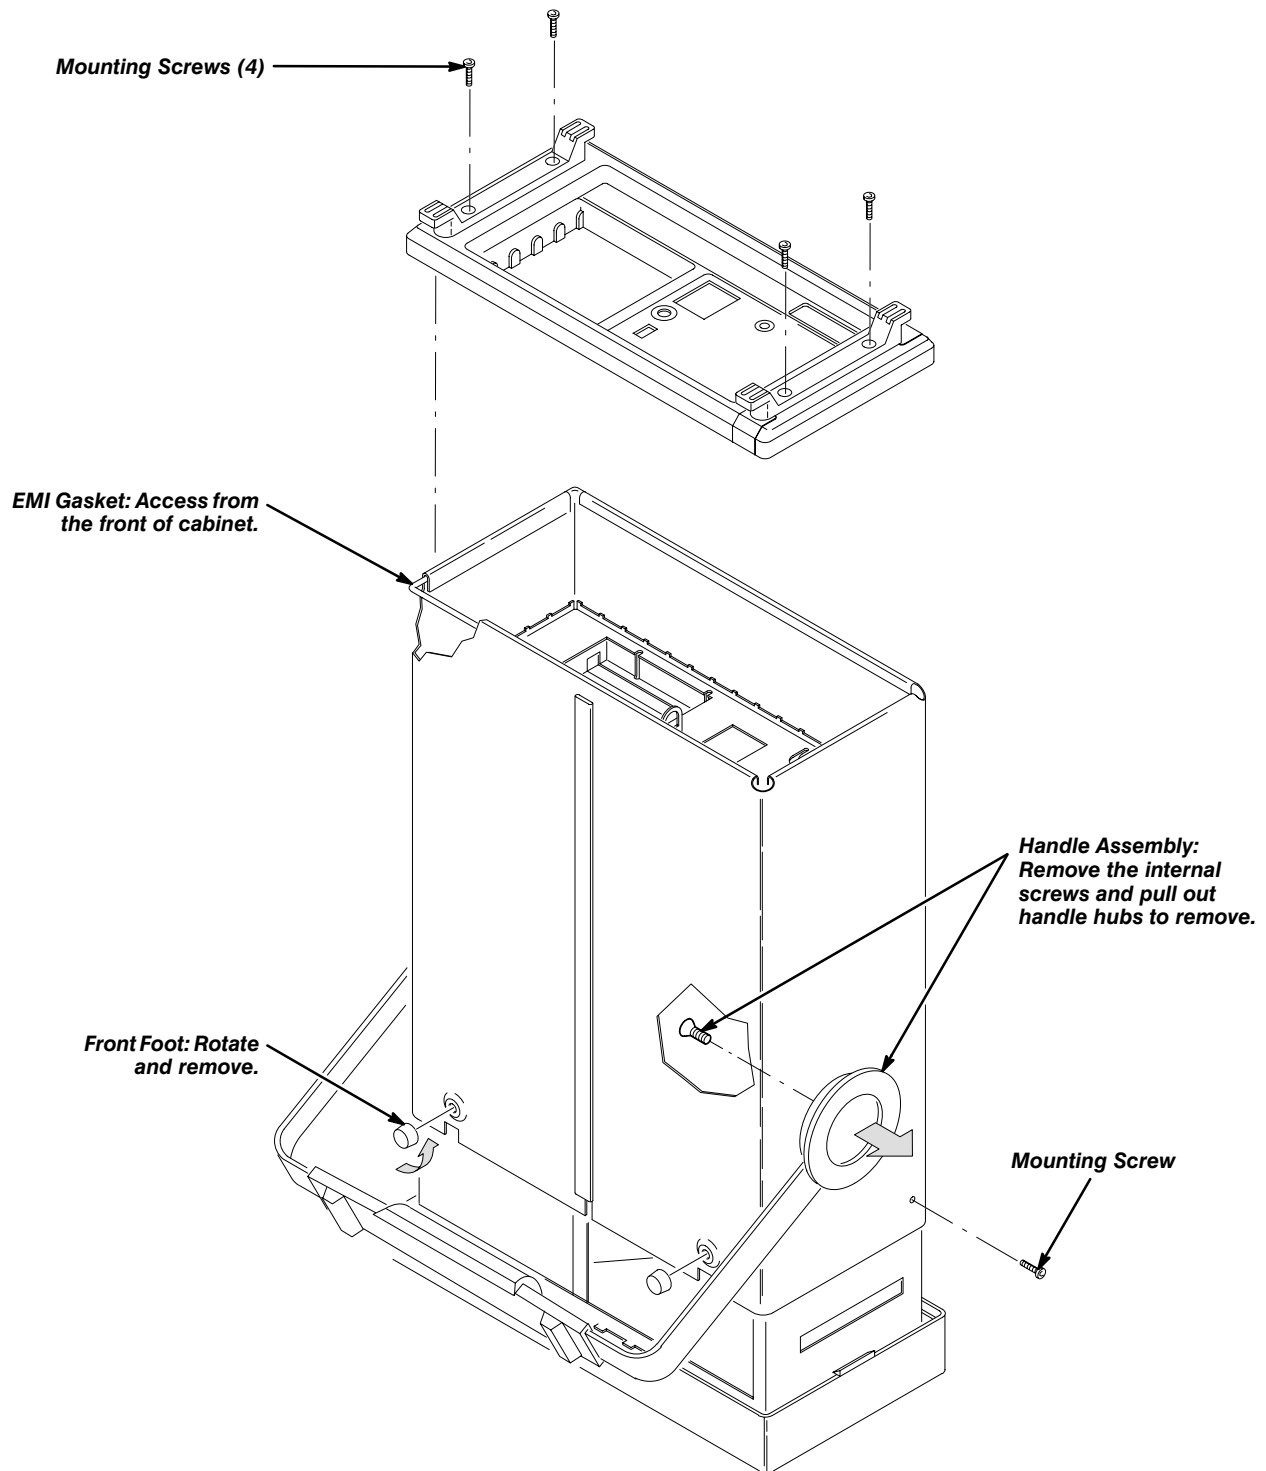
Rear Cover, Cabinet, and Cabinet Handle and Feet Removal
